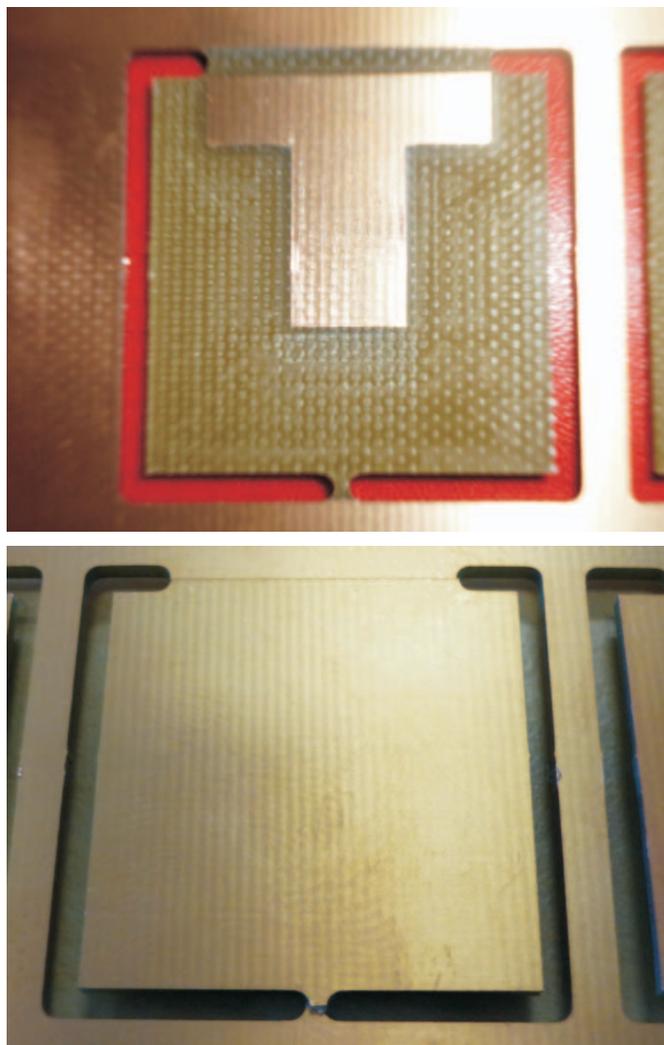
T-Shape copper conductor on PCB top side (left) and PCB bottom side
